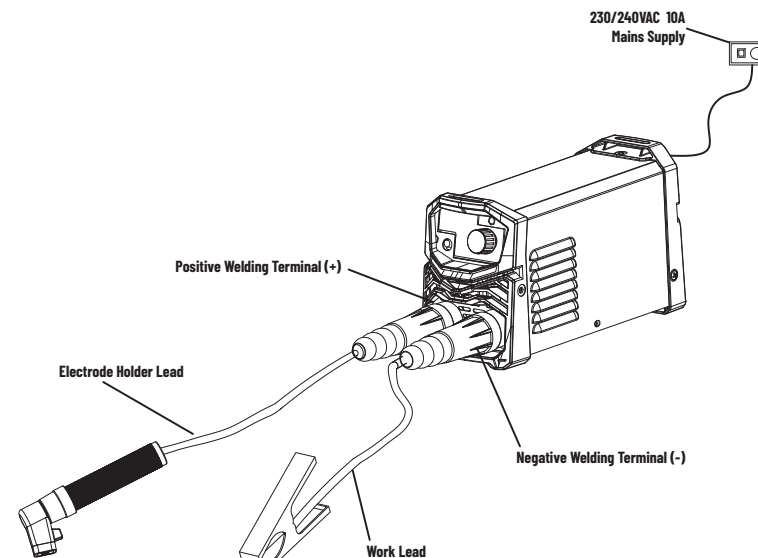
Setup for STICK (MMA) Welding
